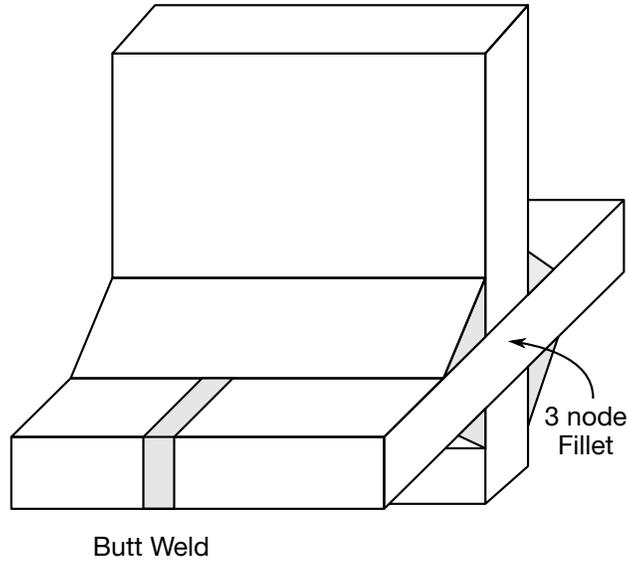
A combined weld is a mixture of fillet and butt welds.
